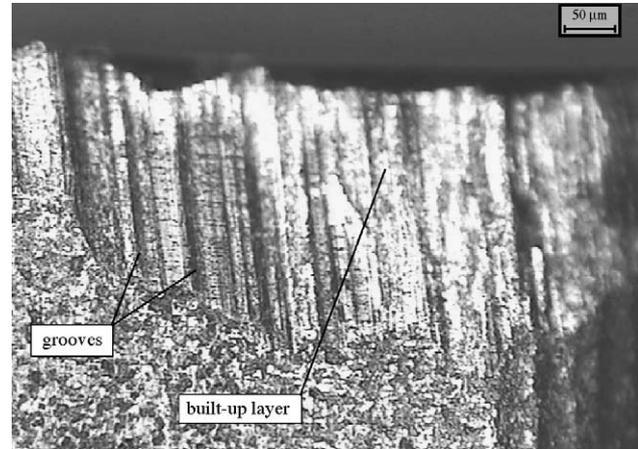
A typical flank wear scar with grooves and built-up layer.
